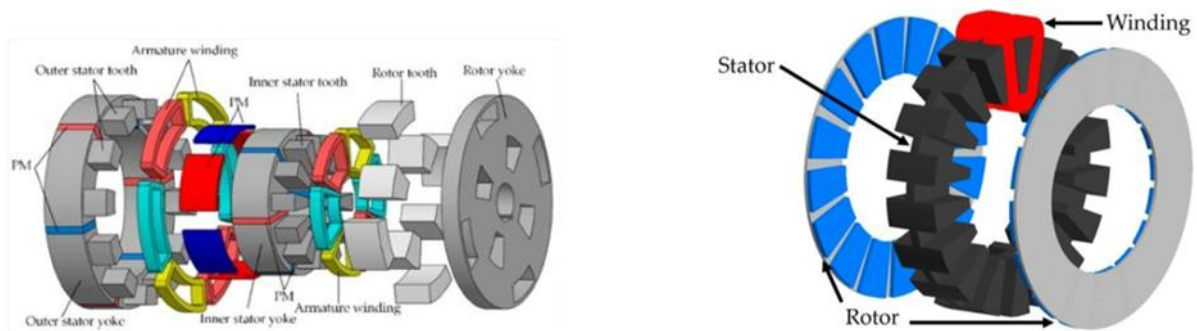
Exploded views of axial flux machine assemblies. (A) dual-rotor, with the key components including the rotor yoke, stator teeth, armature windings, permanent magnets (PM), and yoke structures (Zhang et al., 2022). Core components (B): stator, rotor, and winding arrangement (Credo et al., 2021).
